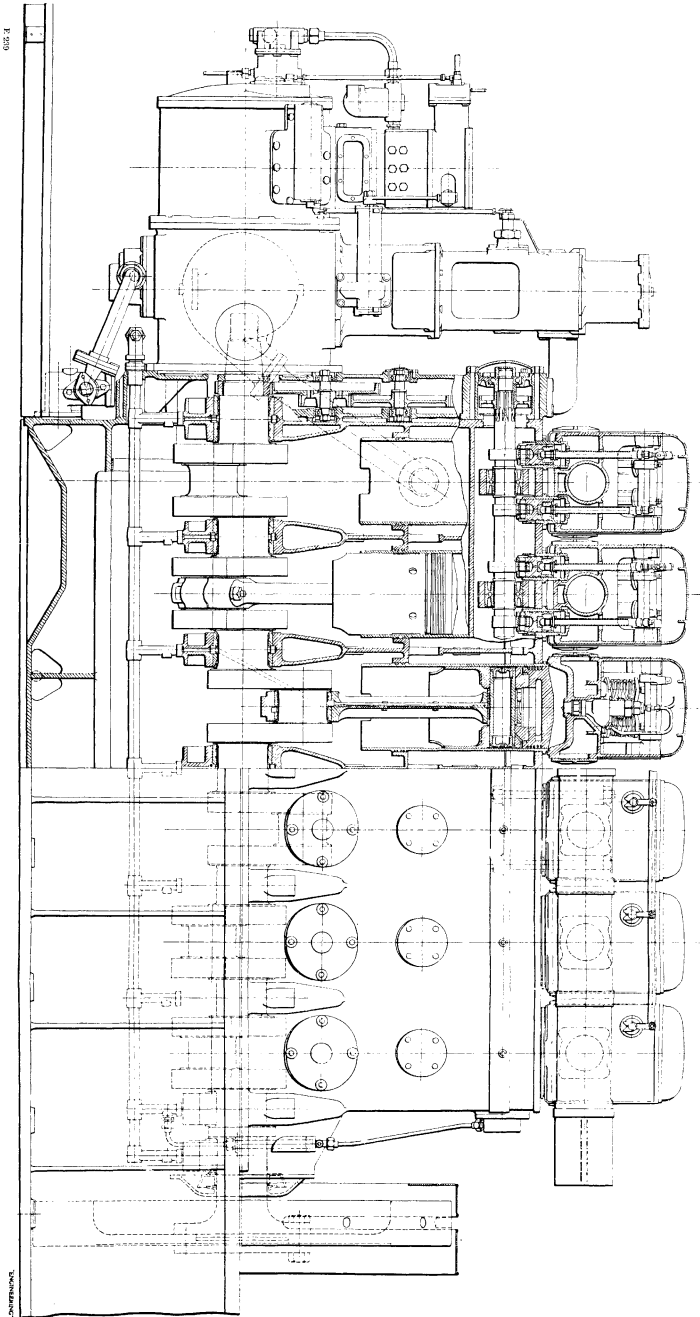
A.—BEARDMORE HIGH-SPEED AIRLESS-INJECTION HEAVY-OIL ENGINE
